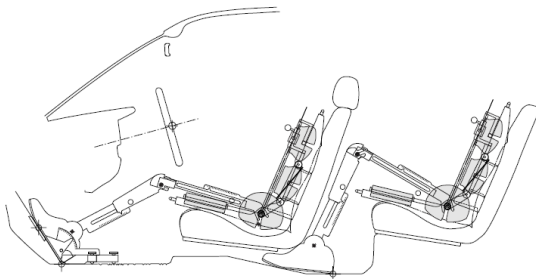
ASPECT manikin used to measure driver and rear seating package geometry (Reed et al. 1999)
